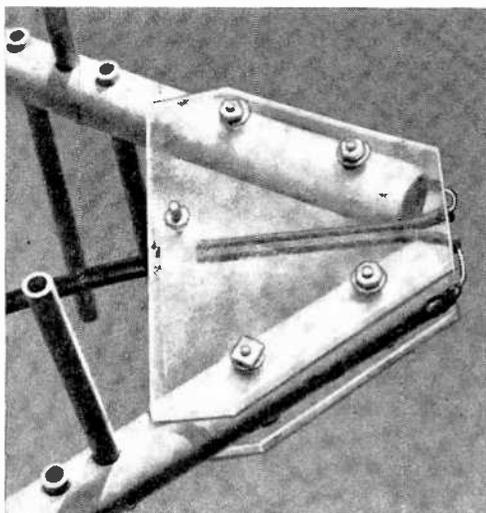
The nose assembly fastens together with $\frac{1}{4}$ - $20 \times 2\frac{1}{2}$ " hardware, cable clamp with 6-32 hardware.
